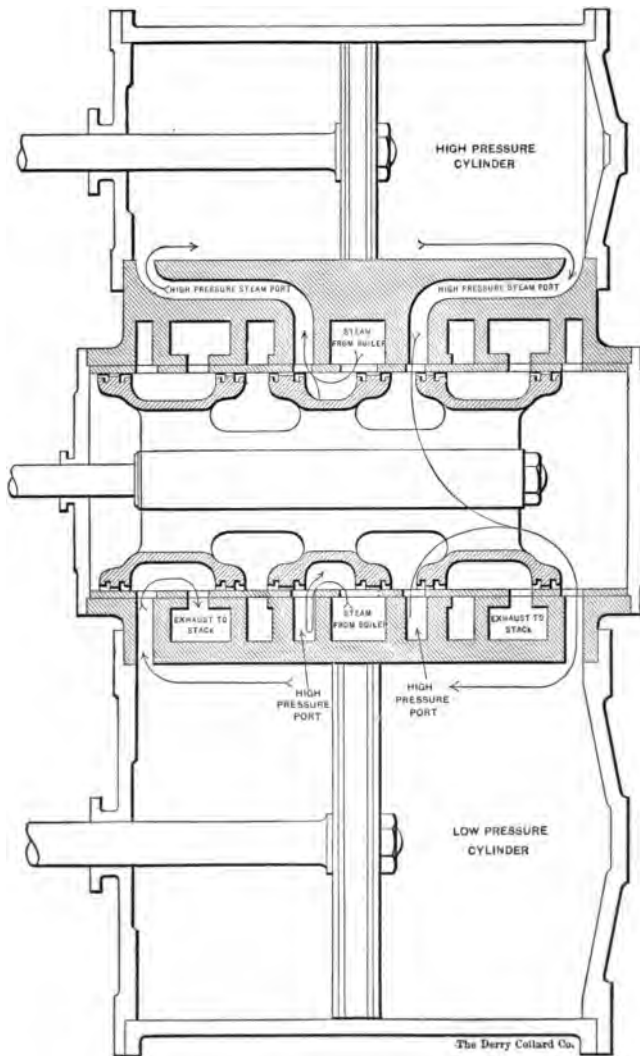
Cylinders and valve of Baldwin balanced engine, DeGlehn type.
